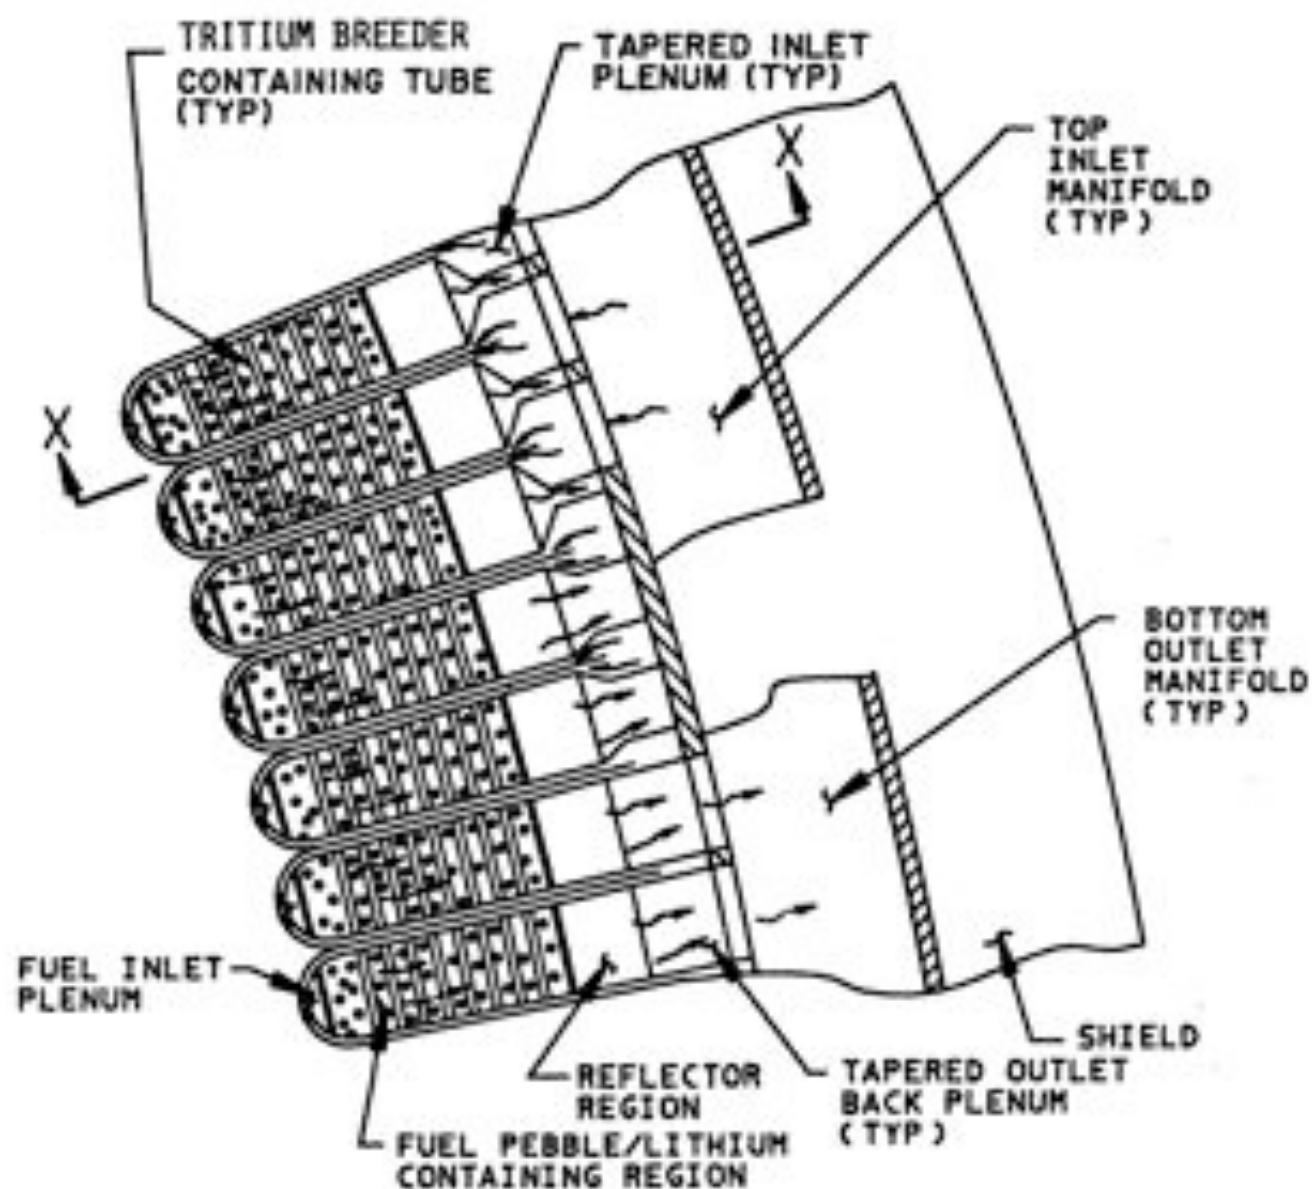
Enlarged view of helium cooled outer blanket module concept showing coolant manifolds and module cooling arrangement.
